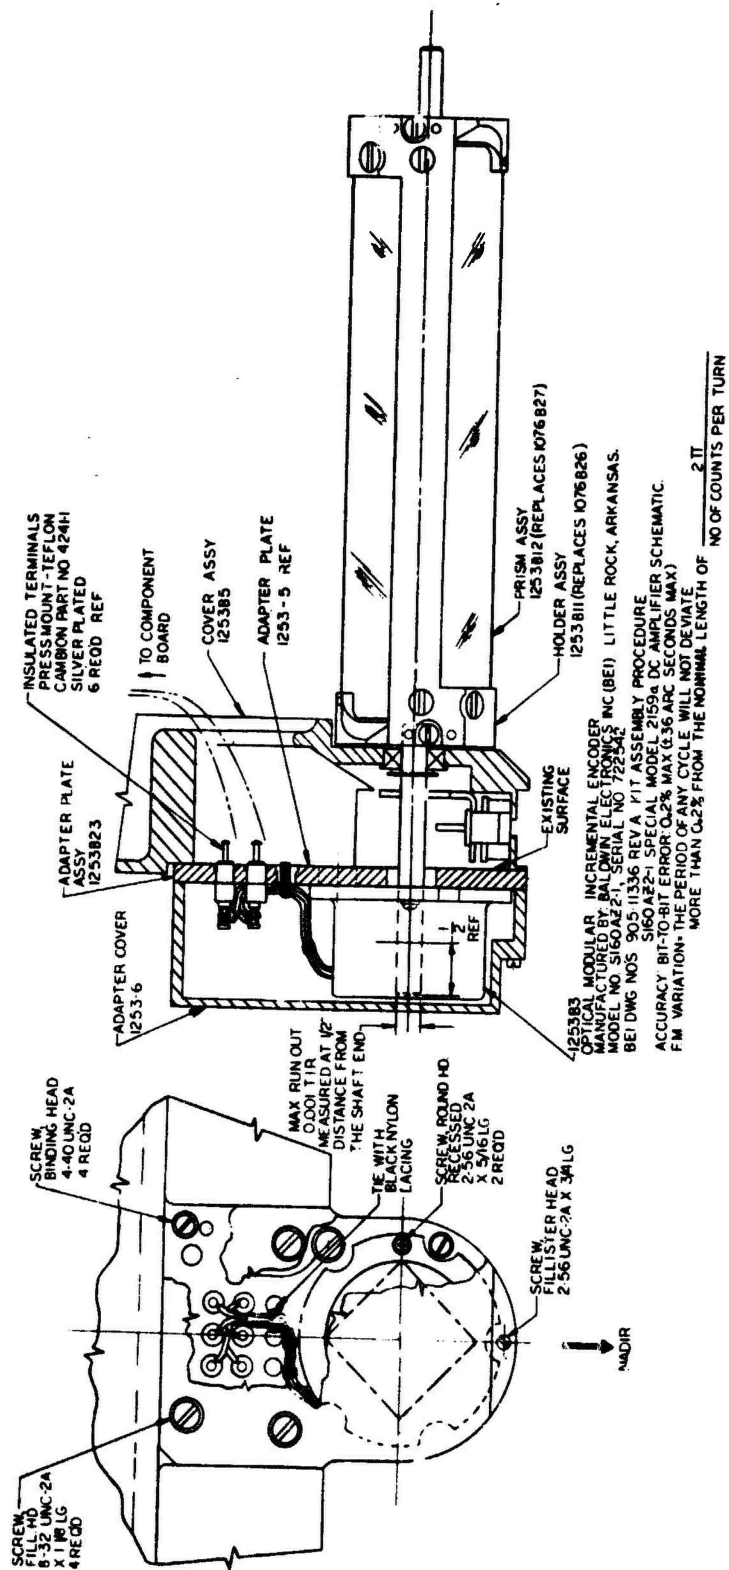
KA-56B MODIFICATION ASSEMBLY LAYOUT (Sheet 2 of 4)
